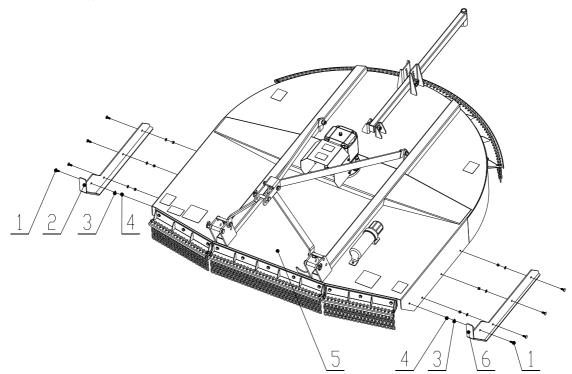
Installing R&L Skid Weldment and Fittings
